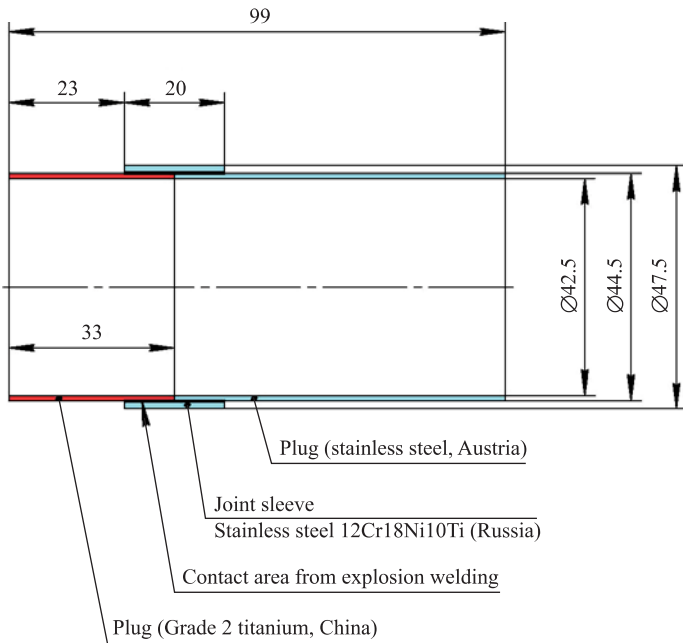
Design of the bimetallic tube billet with the joint sleeve
